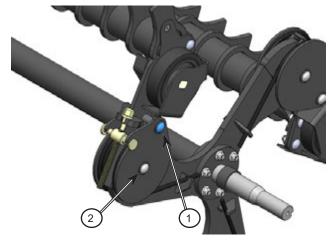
Install the locking bolts (Only reel shown for clarity)
